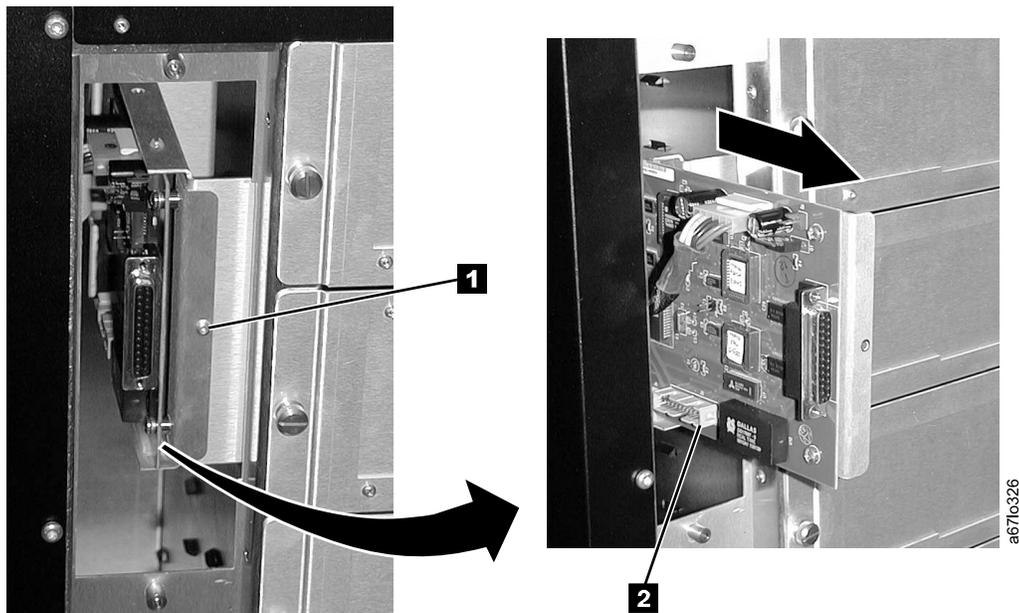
Sliding the Main Controller PCBA Out of the Guiding Tracks
